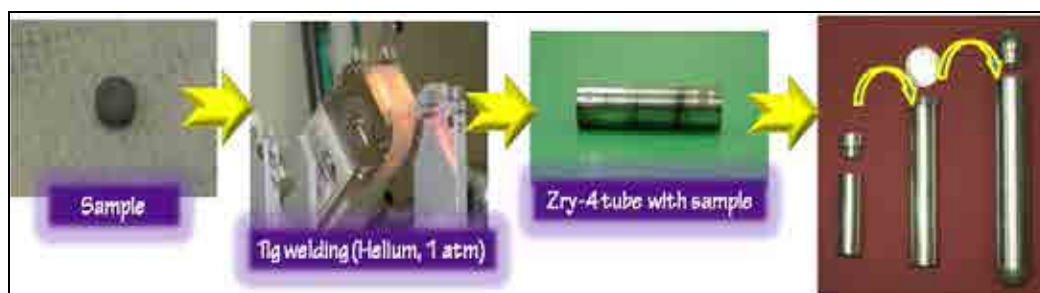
Sample container (welding) for irradiation.
